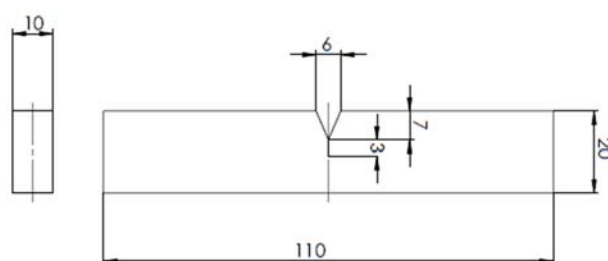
The dimensions of the test specimen, including the fatigue crack.
